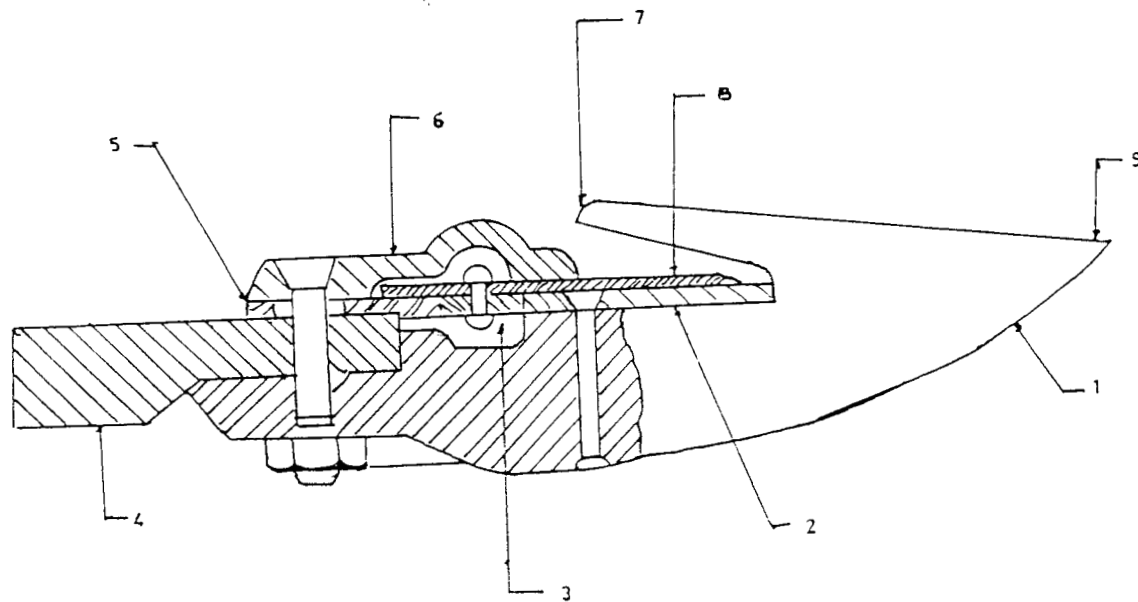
DETAILS OF KNIFE SECTION USED IN THE REAPER
